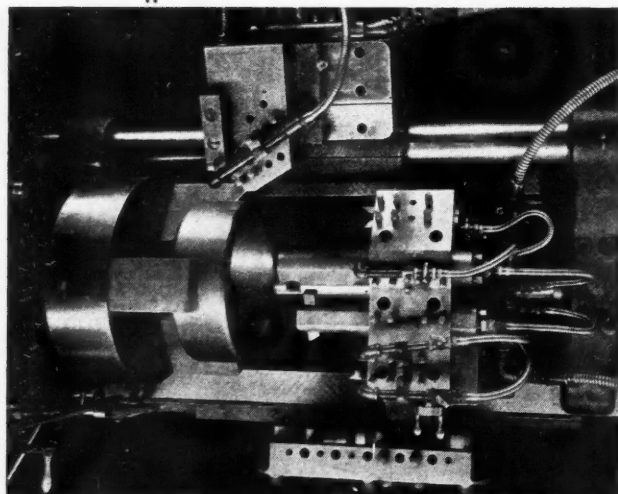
(above)—Two Fay 24-in. automatics used to machine large roller bearings
